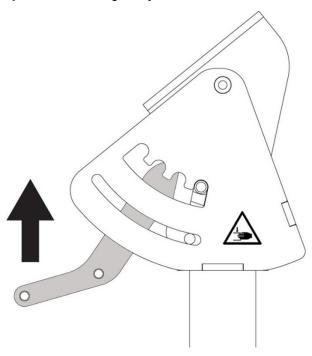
Dispenser Head Angle Adjuster Handle Locked
